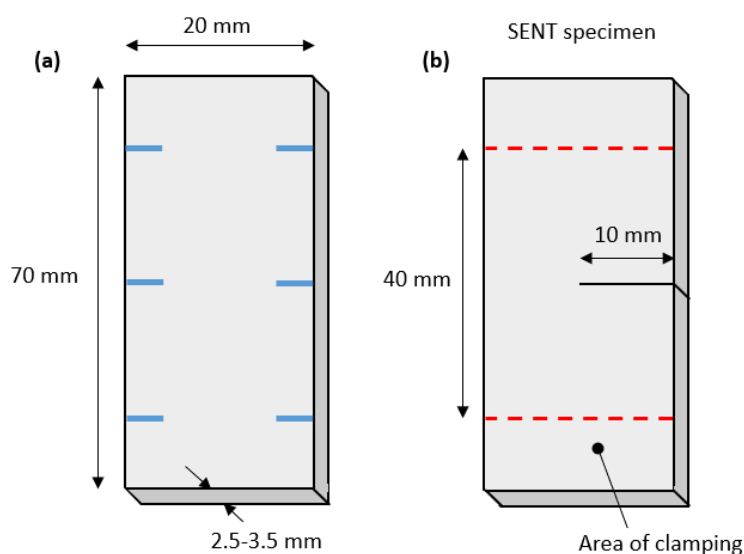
Scheme of the fracture test specimens showing: (a) samples obtained after demoulding and die cutting, marking in blue the six measurement points to calculate the thickness and (b) samples with the pre-notch made, outlining the area of clamping.
